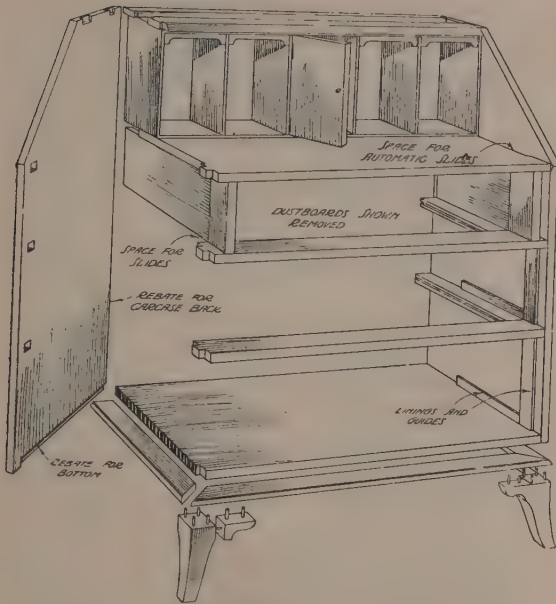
CONSTRUCTION OF LOWER CARCASE.
